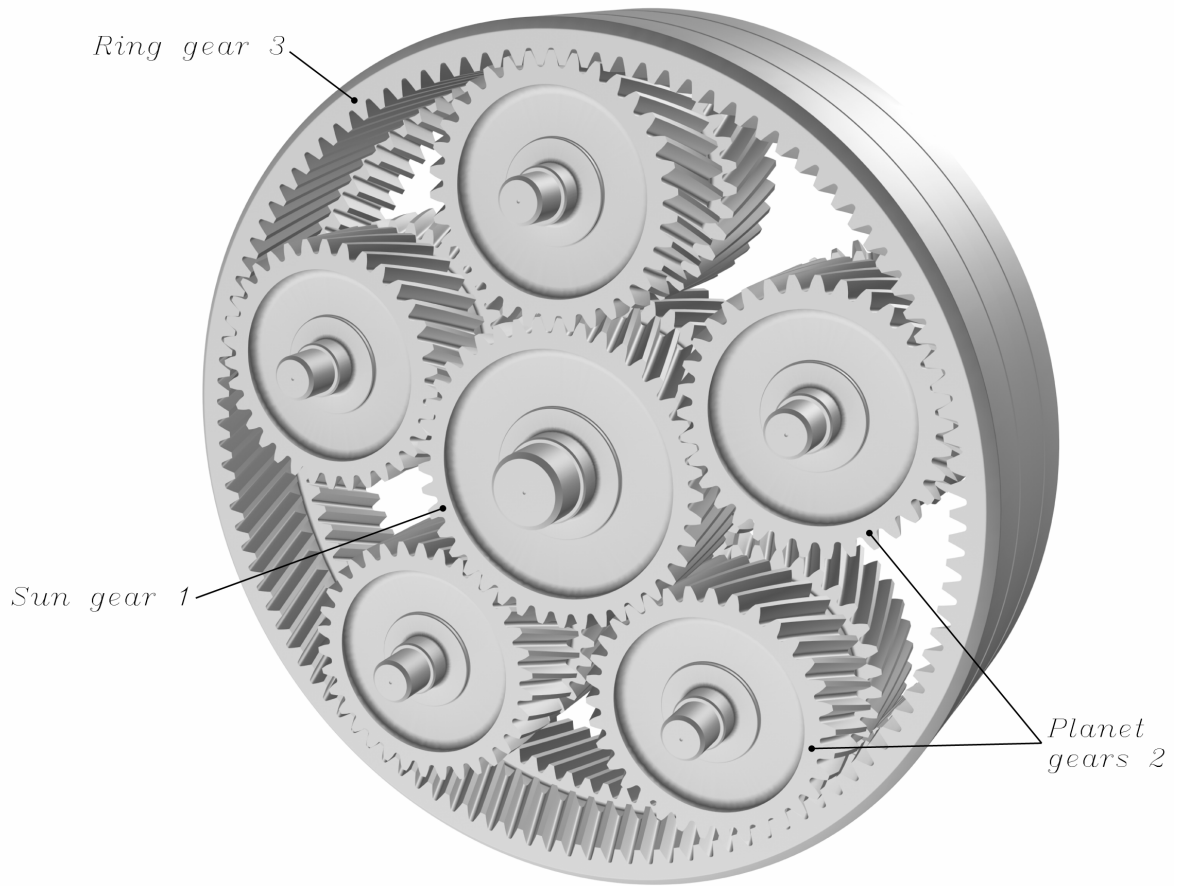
Schematic of one-stage planetary gear train with double-helical gears.
